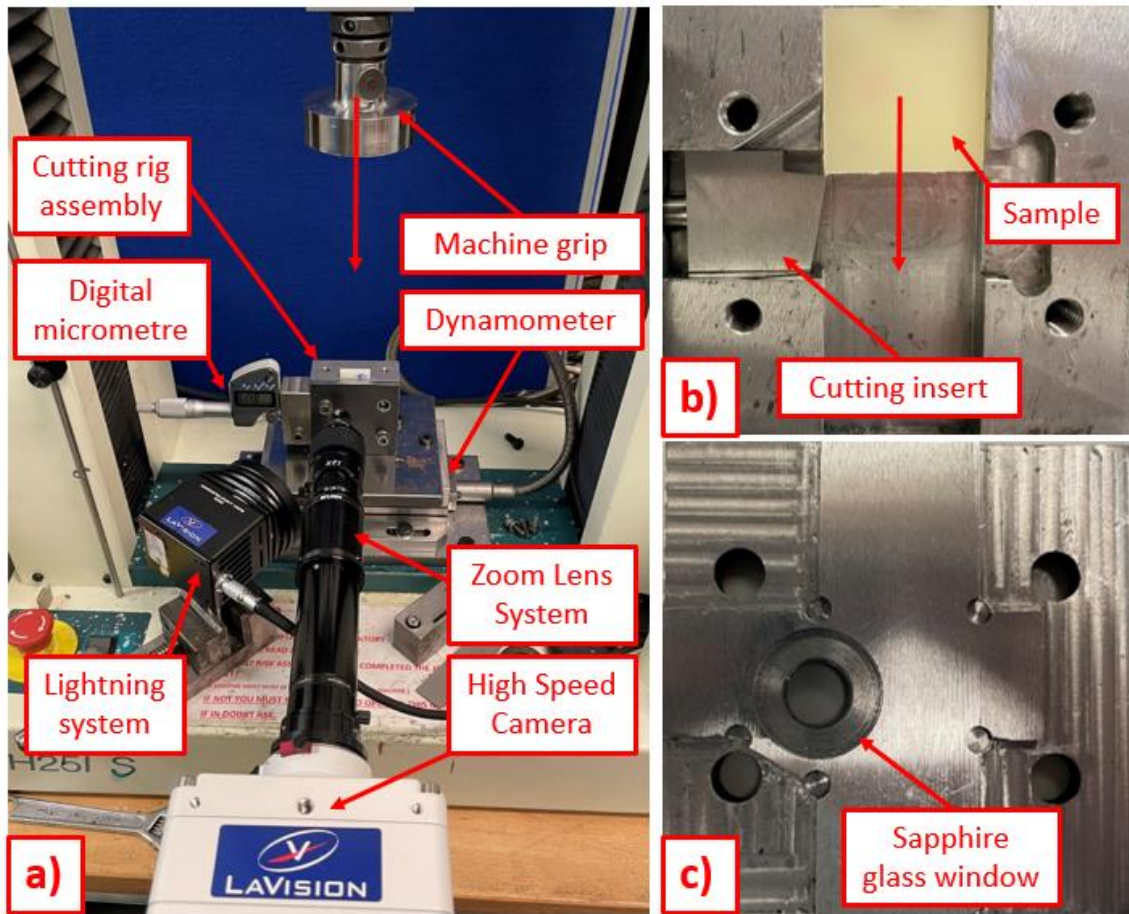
Orthogonal cutting rig setup a) General setup including DIC cameras and machine grip b) Steel wedge block, cutting insert and sample c) Top plate containing the sapphire glass window
